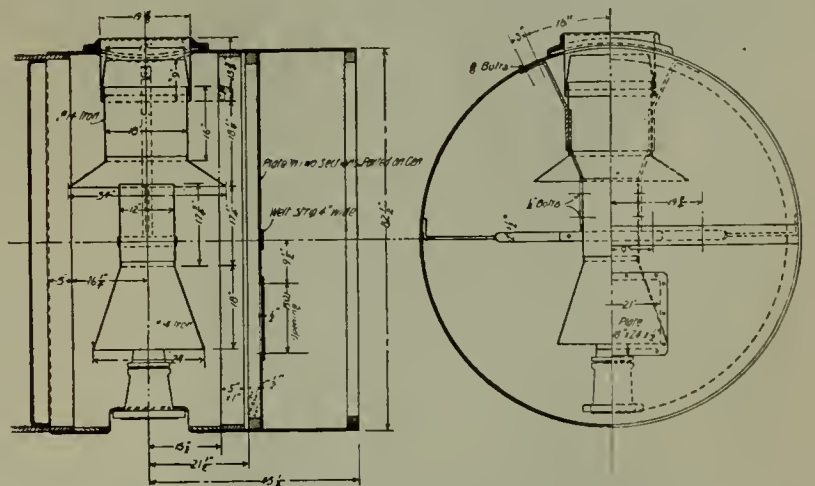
HEAVY FREIGHT LOCOMOTIVE, C., B. & Q. RY.—FRONT END ARRANGEMENT FOR LOCOMOTIVES BURNING LIGNITE.
